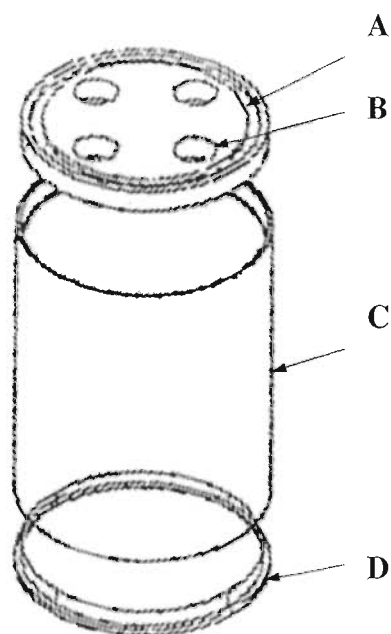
Exploded view of VLE. A: Groove, OD 1.8000", ID 1.600"; B: four 1/4" NPT tapped holes, one for pressure gauge, one for thermocouple, and the other two for carrier gas inlet and gas stream outlet separately; C: 304 SS tubing, length 2.522", OD 2.000", ID 1.900"; D: lid, thickness 0.187", diameter 1.930".
